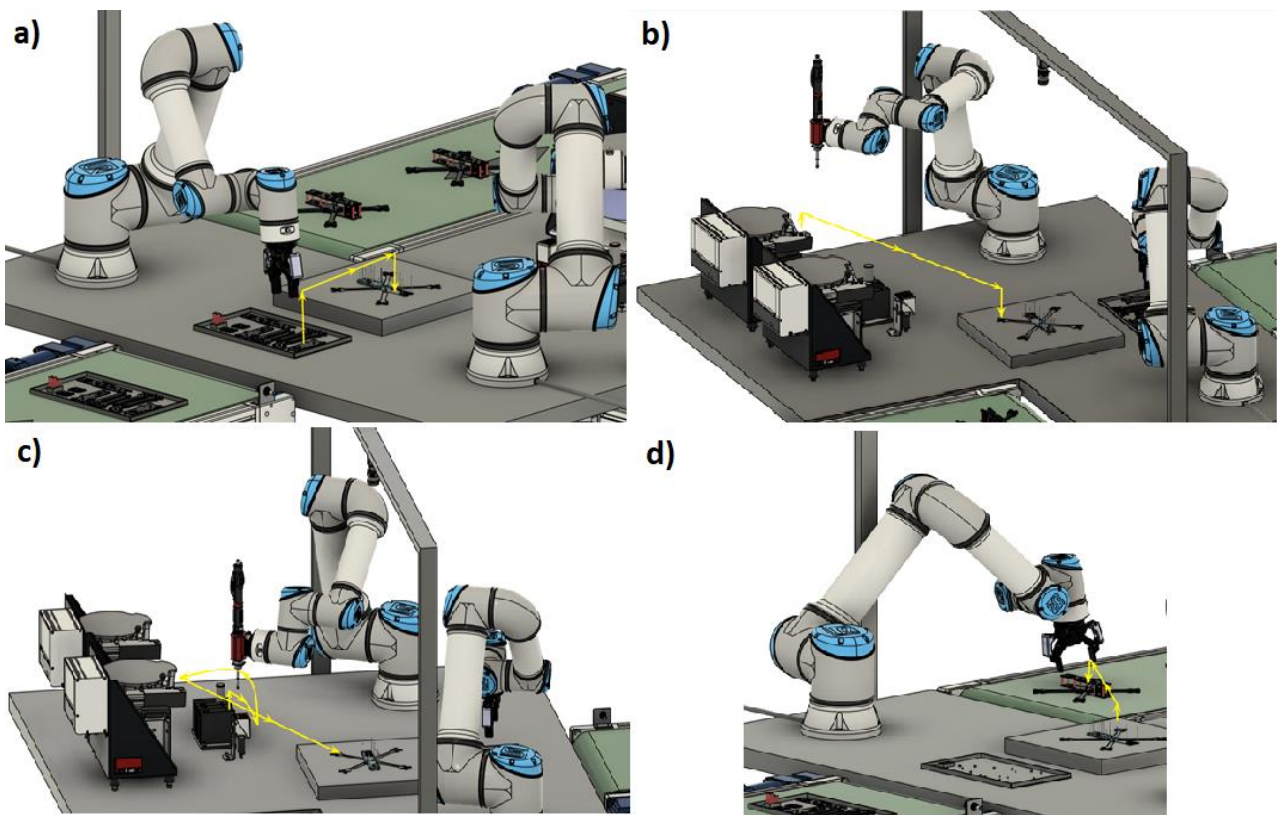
Assembly process a) transferring FPV drone body parts to the assembly table; b) placing nuts on the assembly table; c) changing the tool and receiving the screw; d) placing the finished drone body on the conveyor belt. Source: authors
